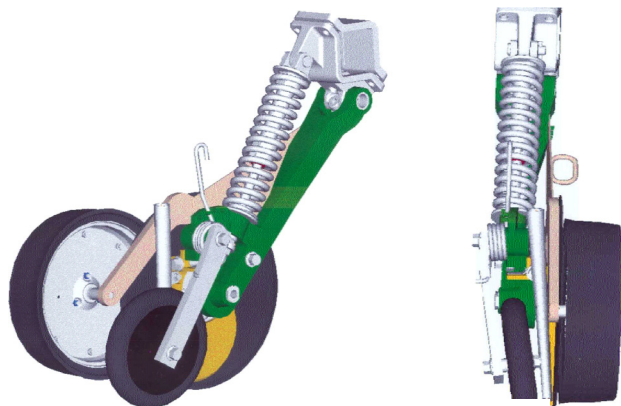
Single-disc injector with depth wheel and spring-loading closing wheel, side and rear views (actual closing wheel used was larger than shown in sketches).
